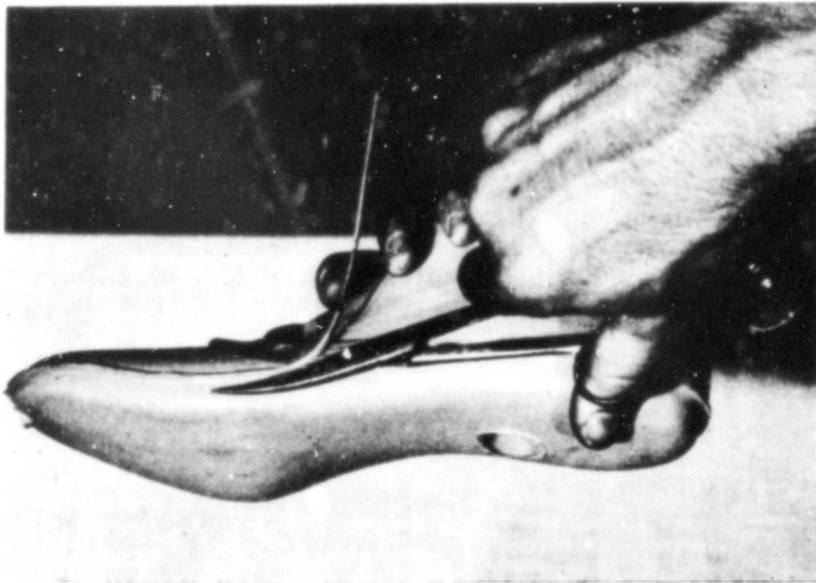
REMOVAL OF FOOT FROM MOLD
